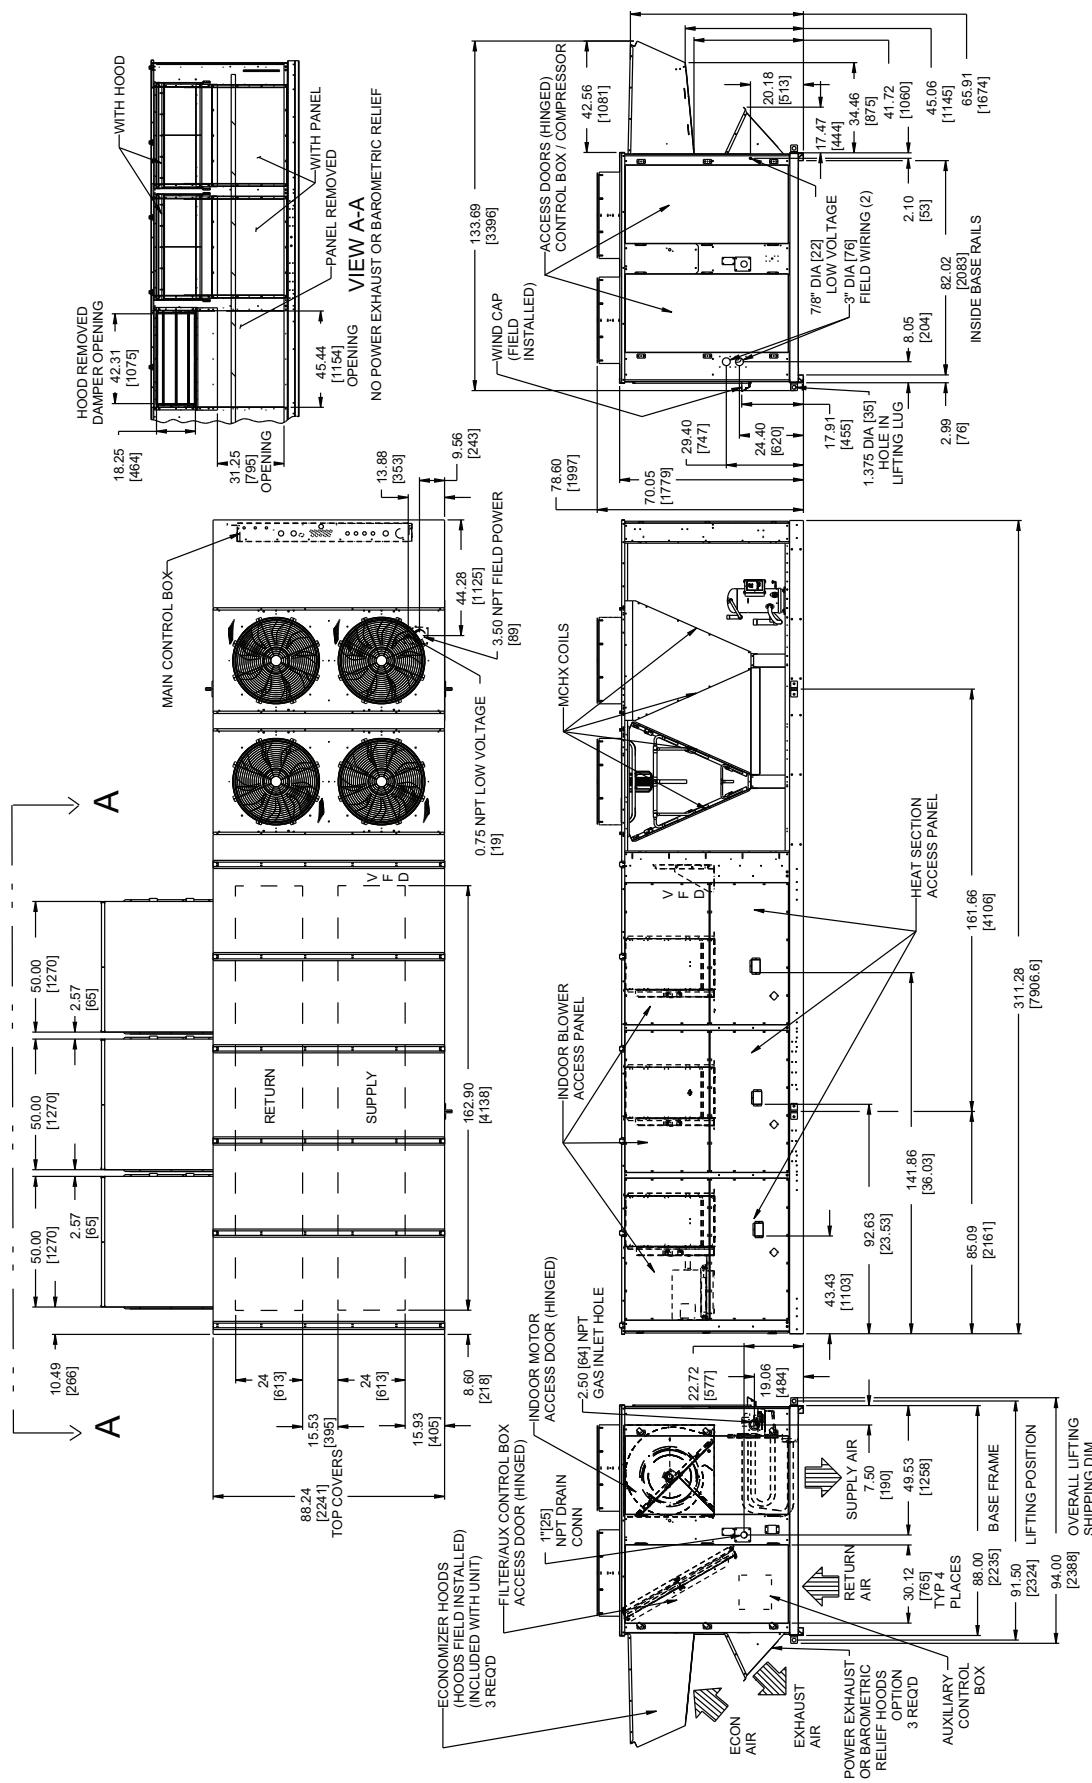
Base Unit Dimensions MCHX, Bottom Supply and Return — 48A2,A3060
